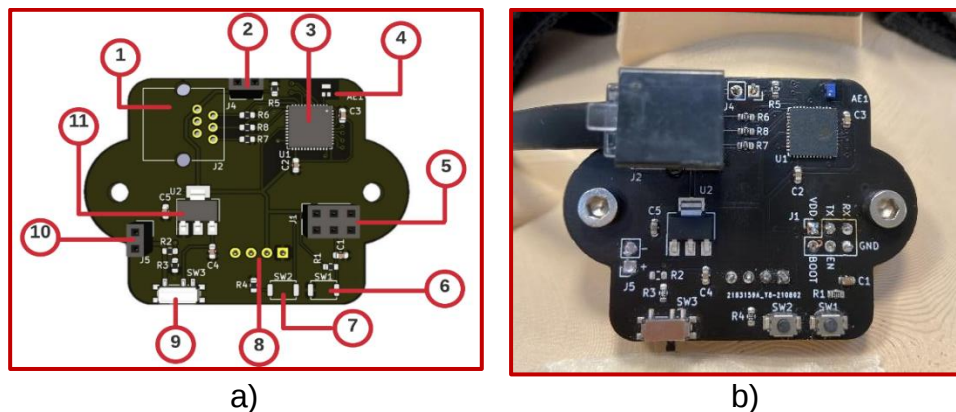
a) Constitution of the PCB; b) Photography of the implementation of the PCB in the collar device.
